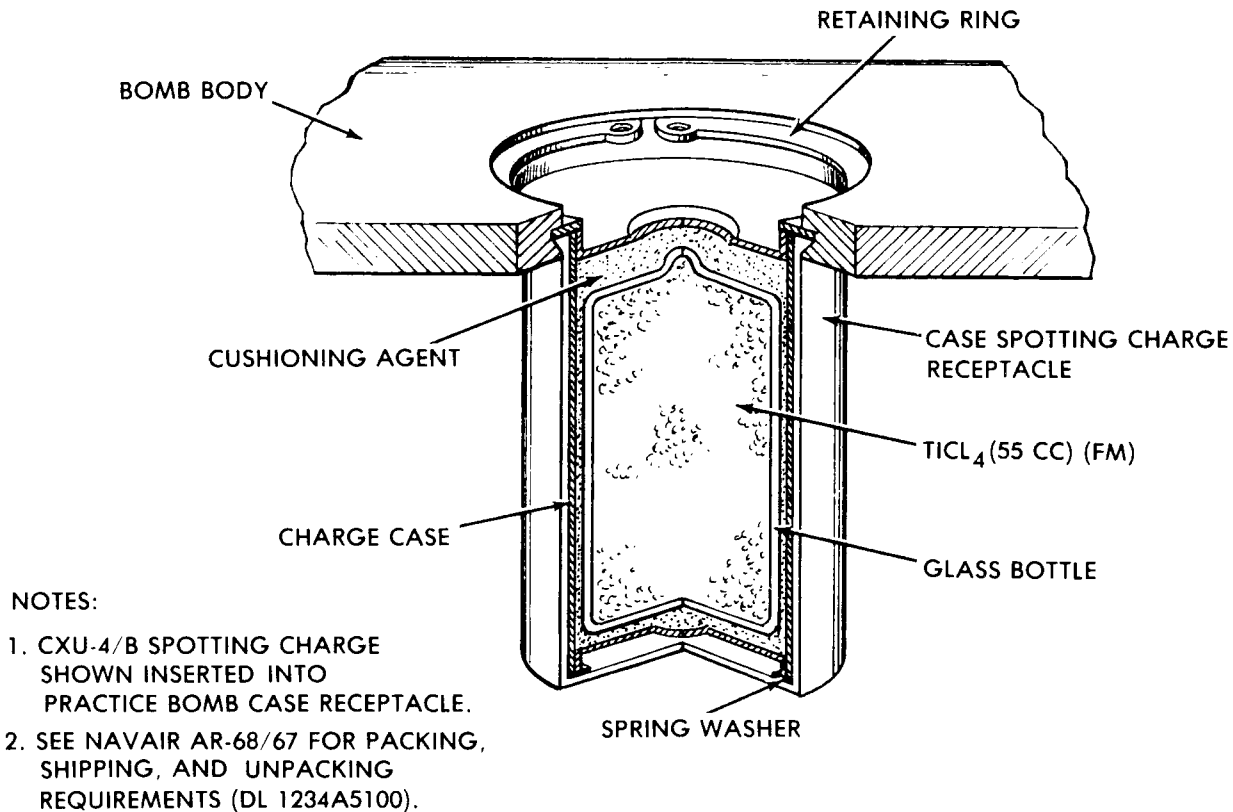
CXU-4/B Spotting Charge, Bomb — Sectional View
